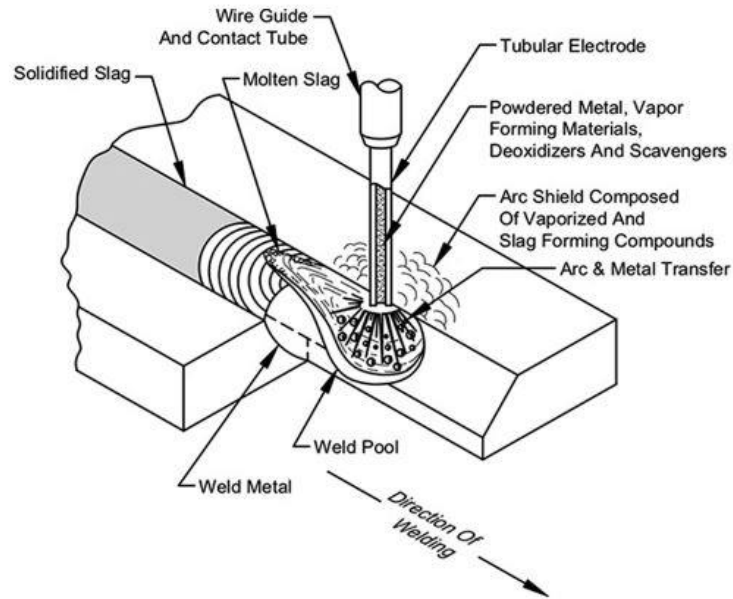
Welding of gas-shielded, flux-cored arc process (FCAW-G) [40]
